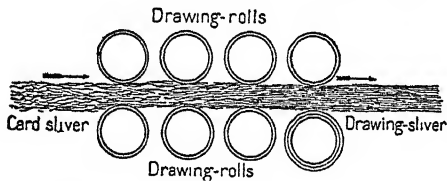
DETAIL OF DRAWING PRINCIPLE.
